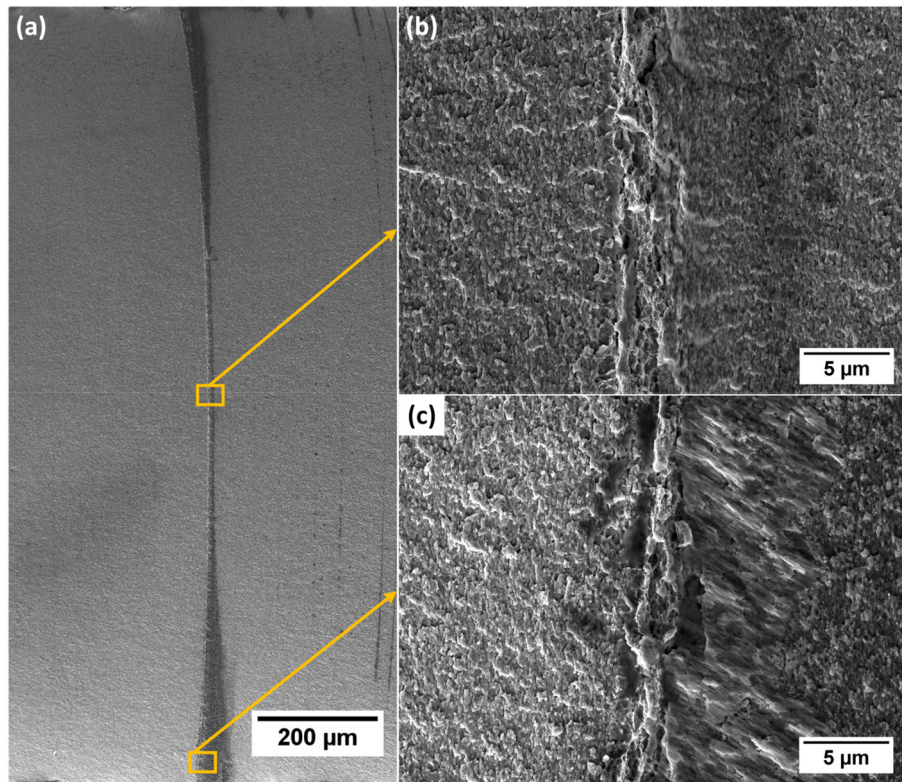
Fractographs from the experiment for NC Ni. (a) Low magnification image of the full crack face. The boundary dividing the fractograph into two parts is the overload position. (b) High magnification through mid-thickness. (c) High magnification near the surface. The crack propagation direction is from left to right.
